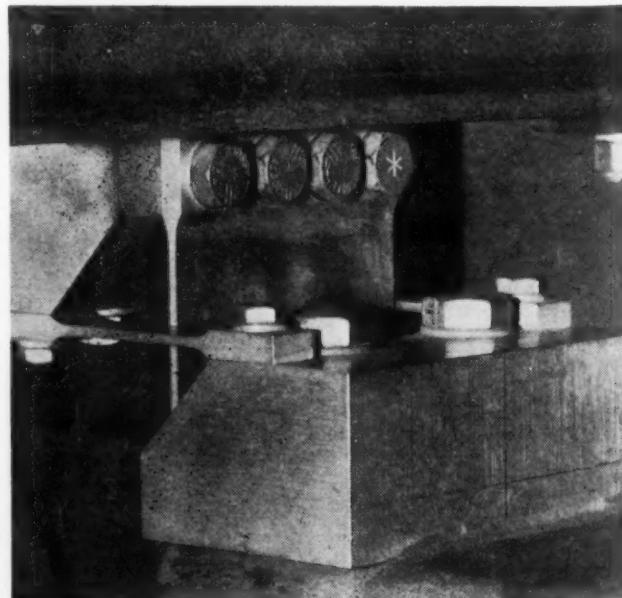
FLEXURE PIVOT—SMALL MACHINE
